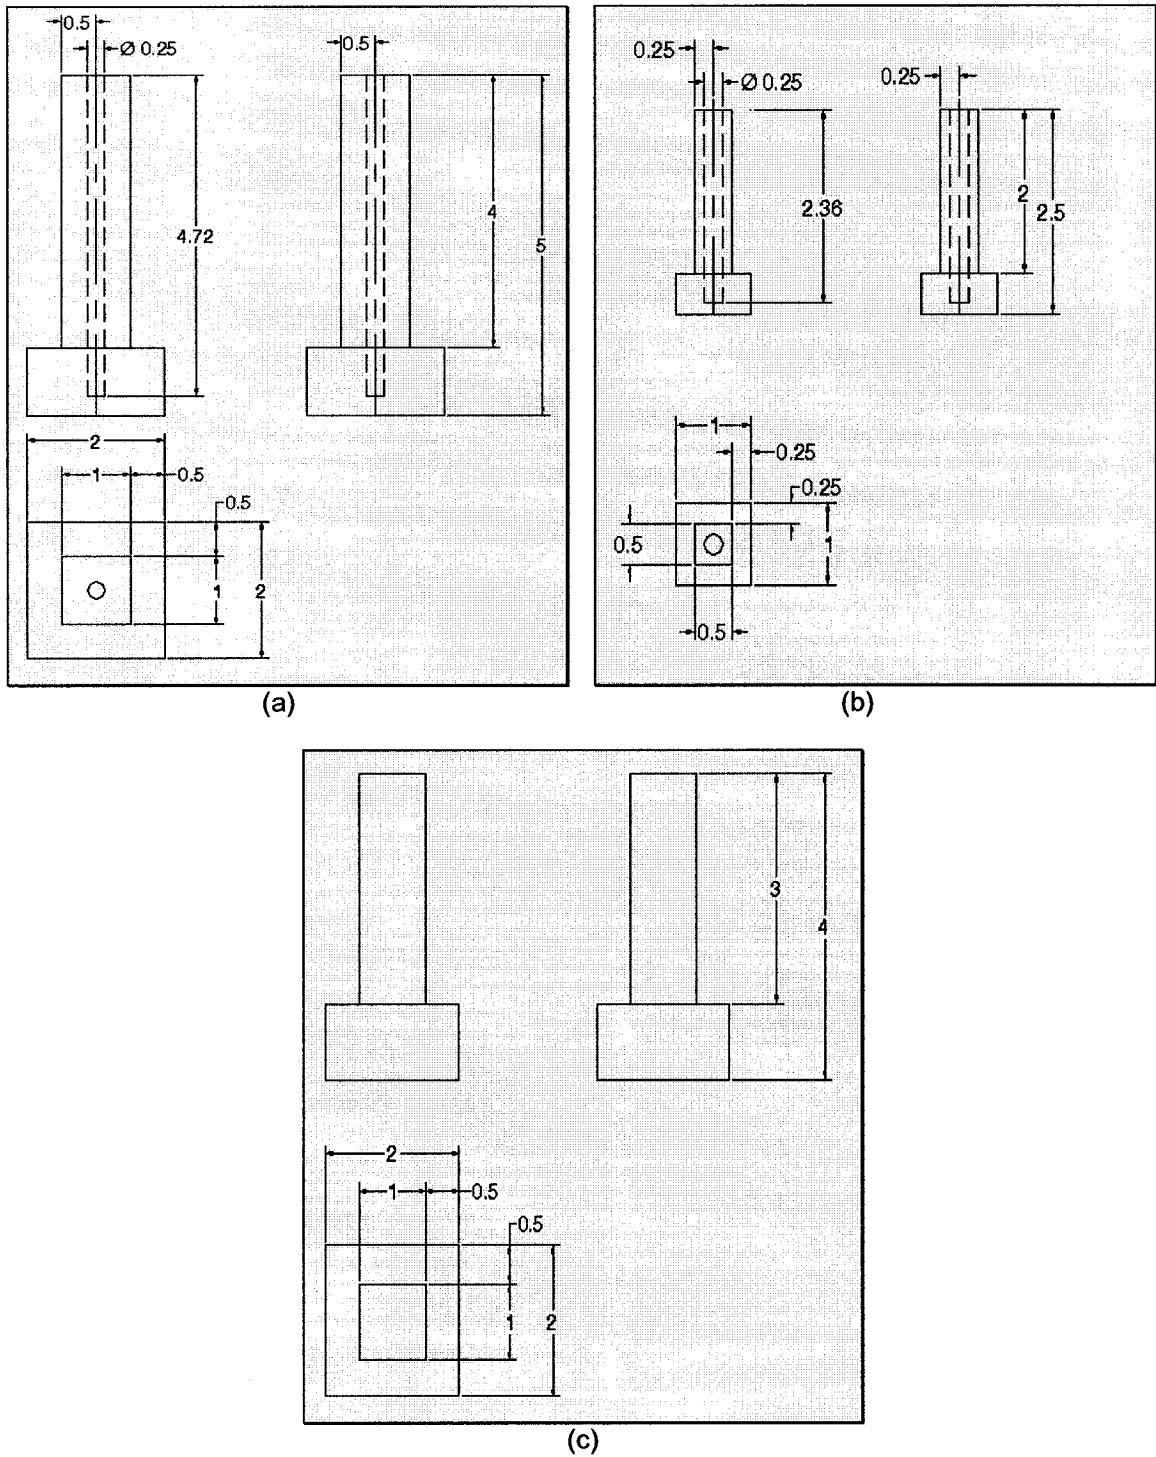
Schematic dimensions of aluminum specimens, (a) Specimen 1, (b) Specimen 2, (c) Specimen 3 (dimensions are in Inches)
